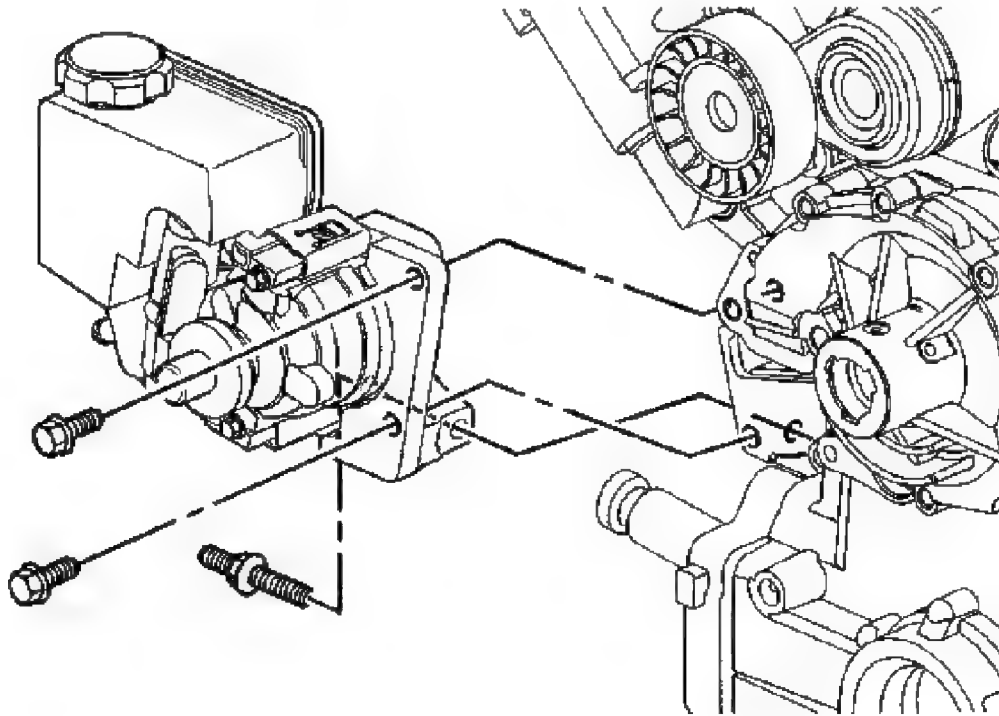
Removing/Installing Power Steering Pump Mounting Bolts
